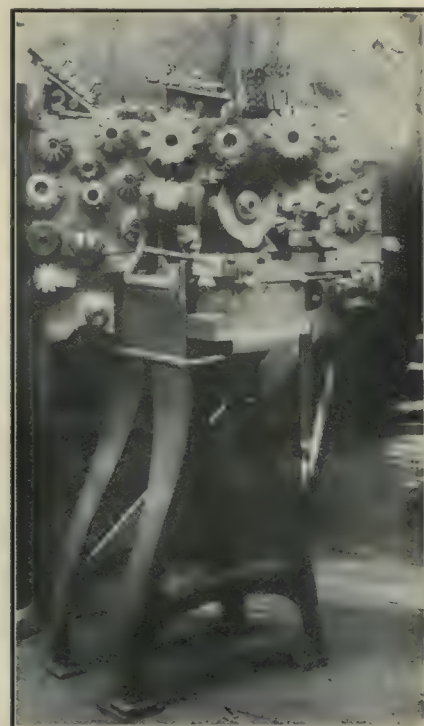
Grinding Small Cutter and Other Cutters Machined on Grinder.
